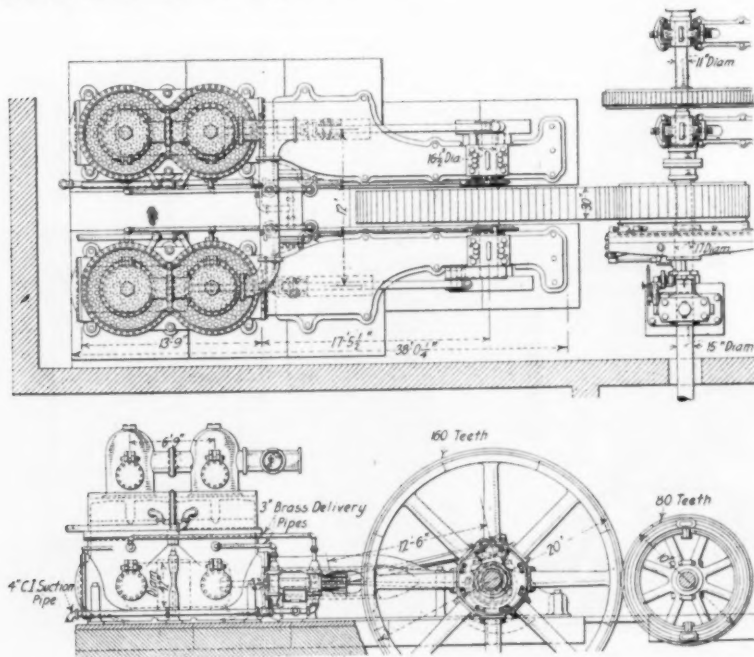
42-IN. X 60-IN. HECLA WET COMPRESSORS
